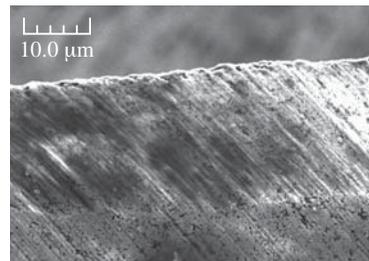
Uniform abrasive flank wear on a carbide tool. (micromist,  $21.7\text{ min}$  @  $15\text{ m/min}$ )
